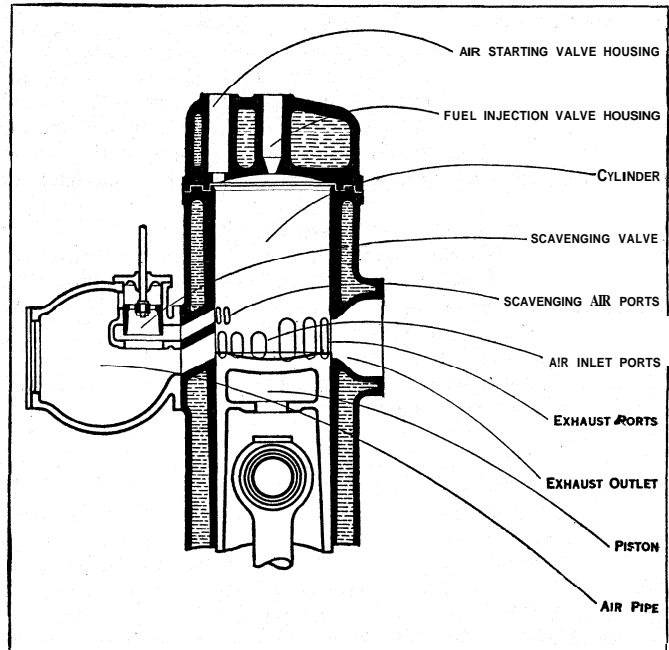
DIAGRAM OF A TYPICAL 2-STROKE DIESEL ENGINE. SHOWING INLET, EXHAUST AND SCAVENGING PORTS
